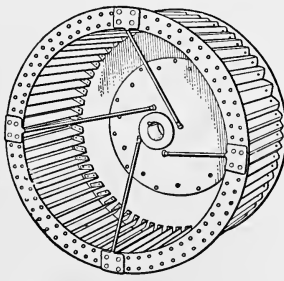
"Sirocco" Wheel—Turbine Type Impeller.
